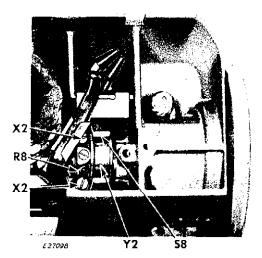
Feed Lifting Connecting Rod on Arm Shaft
